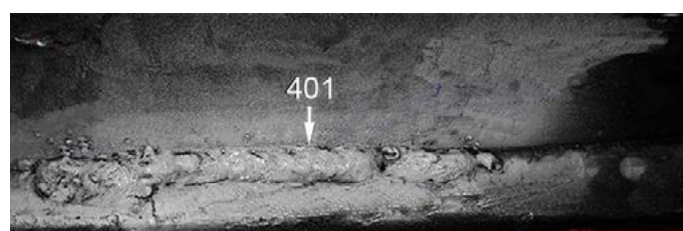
T-joint with the fillet weld (FW) on the side welded using a magnetised electrode, after magnetic particle tests; visible welding imperfections: spatters, the irregularly shaped weld face and incomplete fusion (designated with the arrow)
